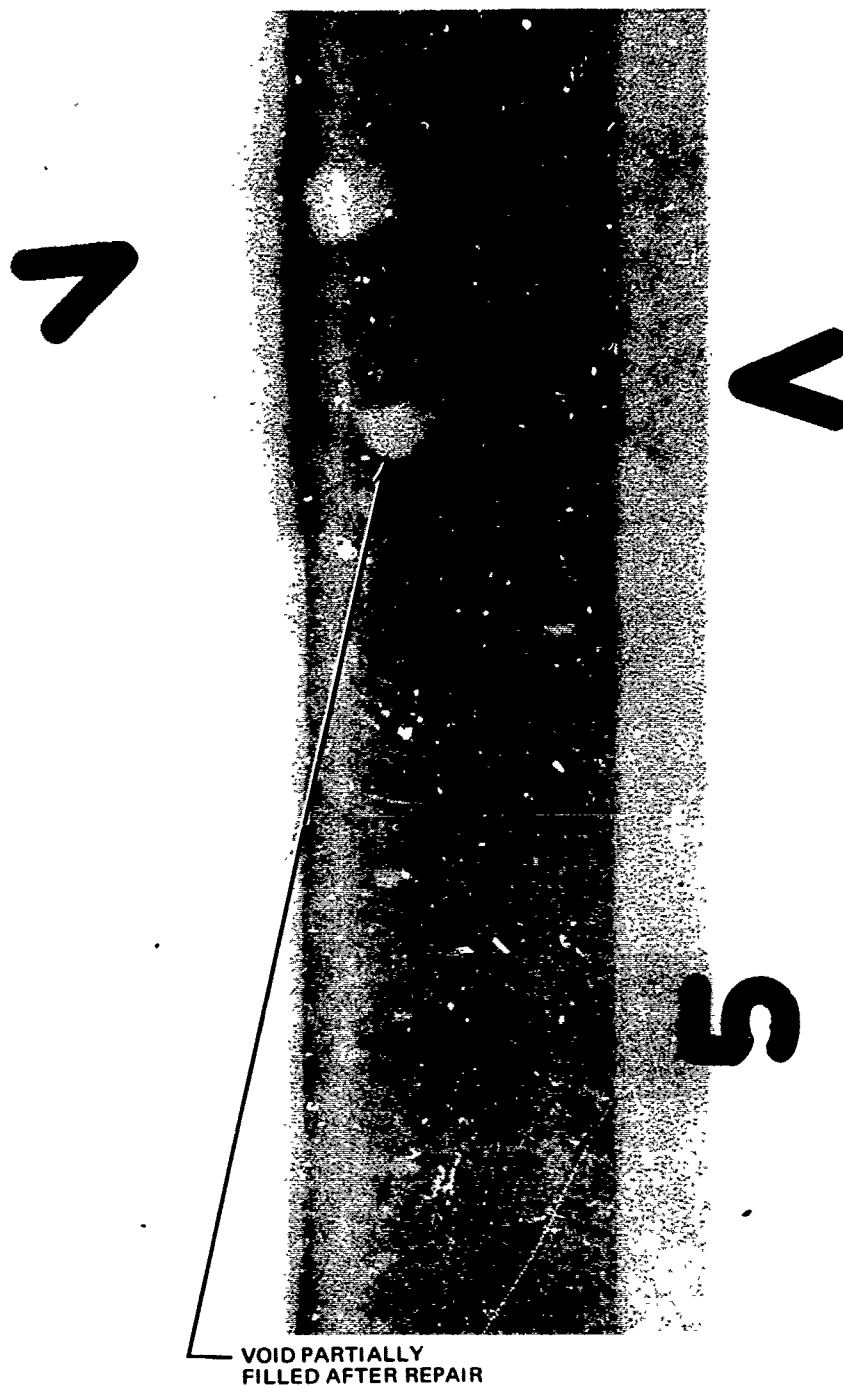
X-RAY INSPECTION OF 5578687-505 FILLET BOND
